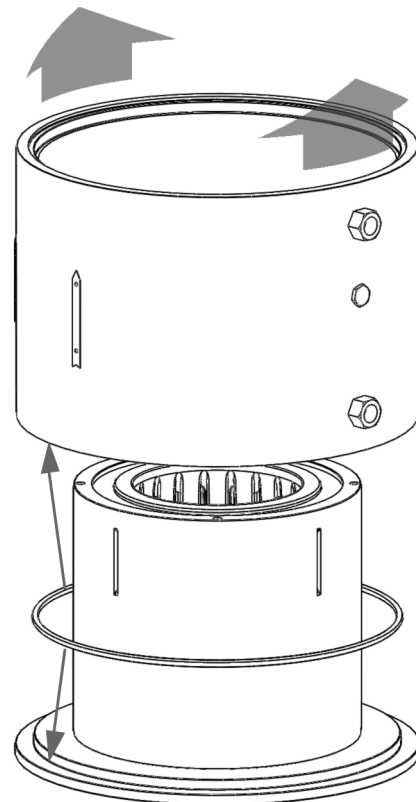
Remove body sleeve and inlet body sleeve O-ring.
